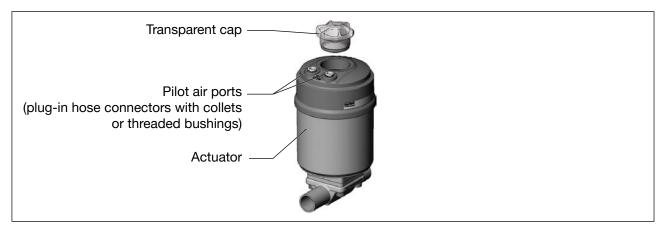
Installing the switch spindle for process valves Types 2103, 2300 and 2301; remove transparent cap and pilot air ports
